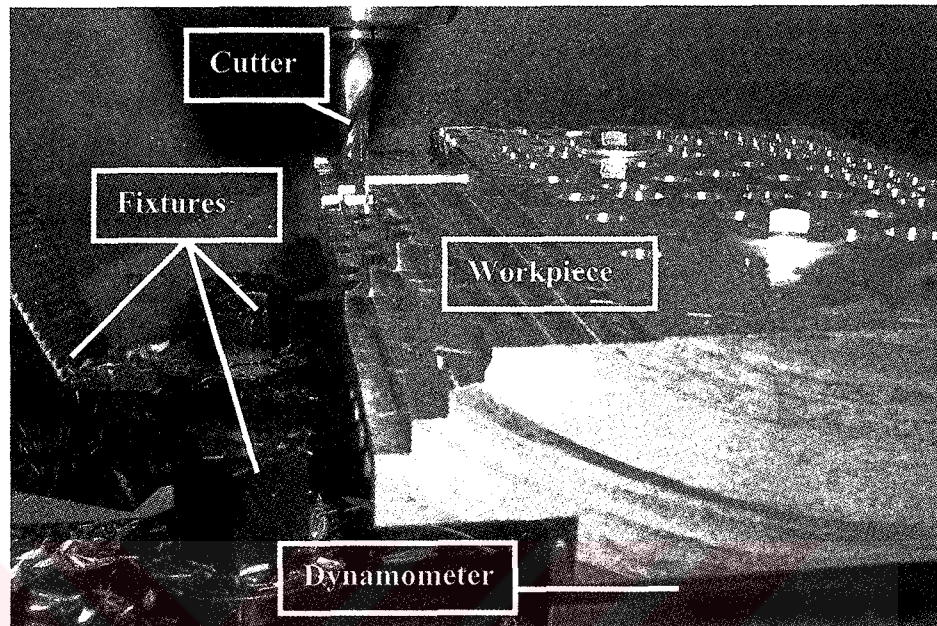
Workpiece and 3-component dynamometer fixed to VMC machine table for cutting tests
